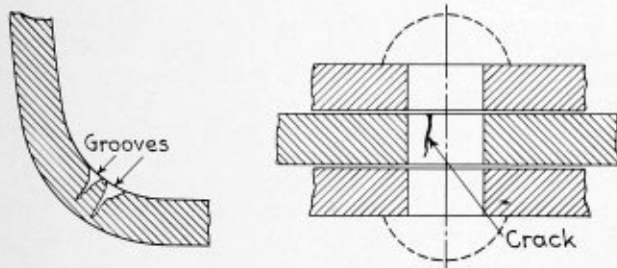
(Left) Typical fracture in watertube boiler drum. Fig. 2. (Right) Dangerous type of plate fracture between the rivet holes
